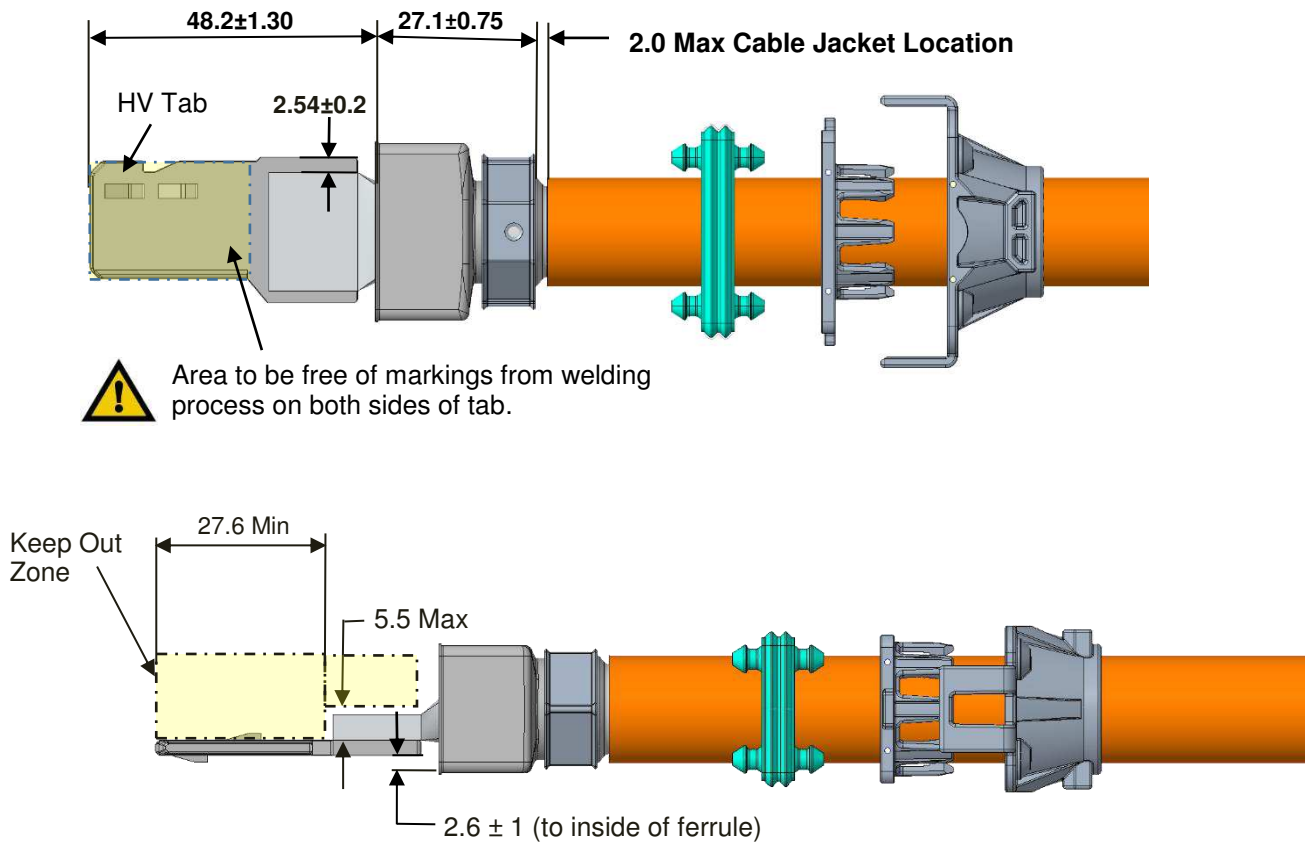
HV Tab ultrasonic welding terminal cavity 1
